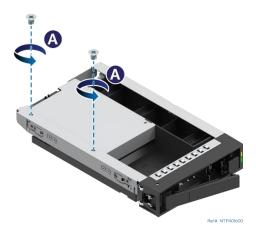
2.5" Drive Mounting Bracket Removal from Drive Carrier (Step 1)
